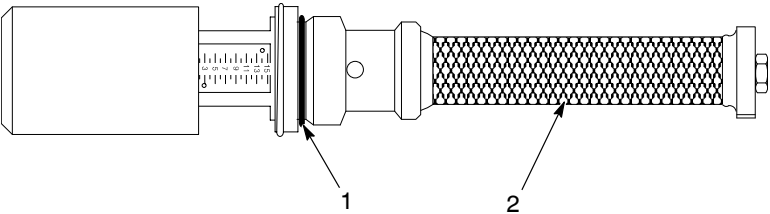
Inspecting the o-ring and filter screen
